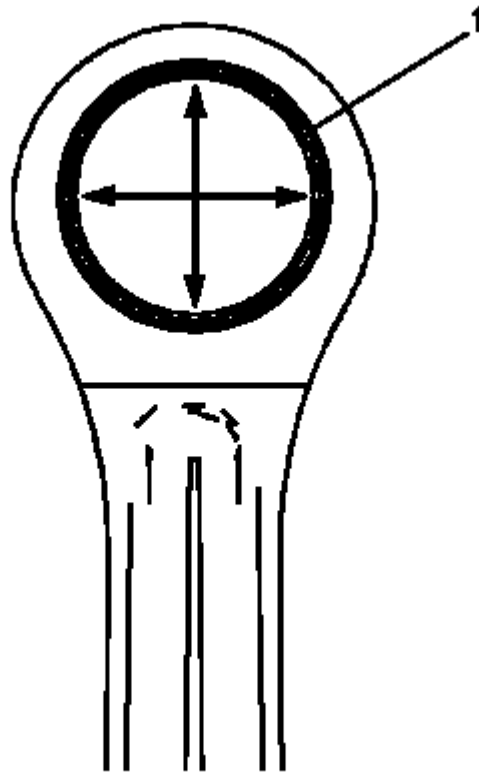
Identifying Connecting Rod Piston Pin Bore
